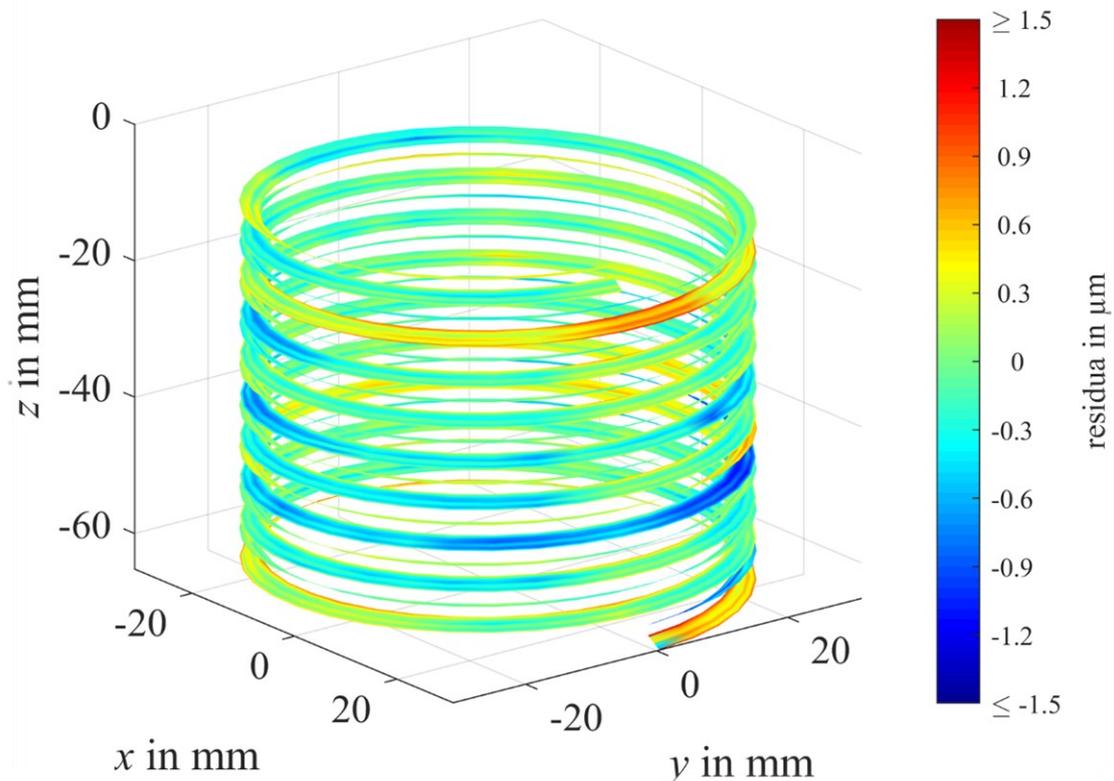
Illustration of the result of the areal thread measurement using a Coordinate Measuring Machine (CMM)
